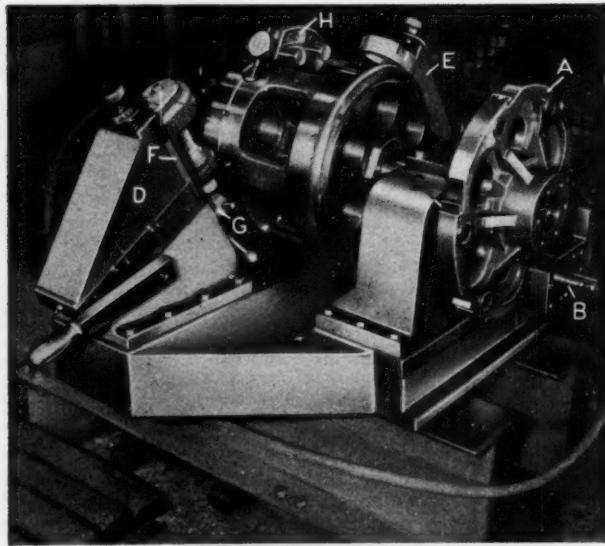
Equipment Specially Developed by the Company for Finish Grinding Drum Locator Pads to Provide a Very High Degree of Indexing Accuracy
